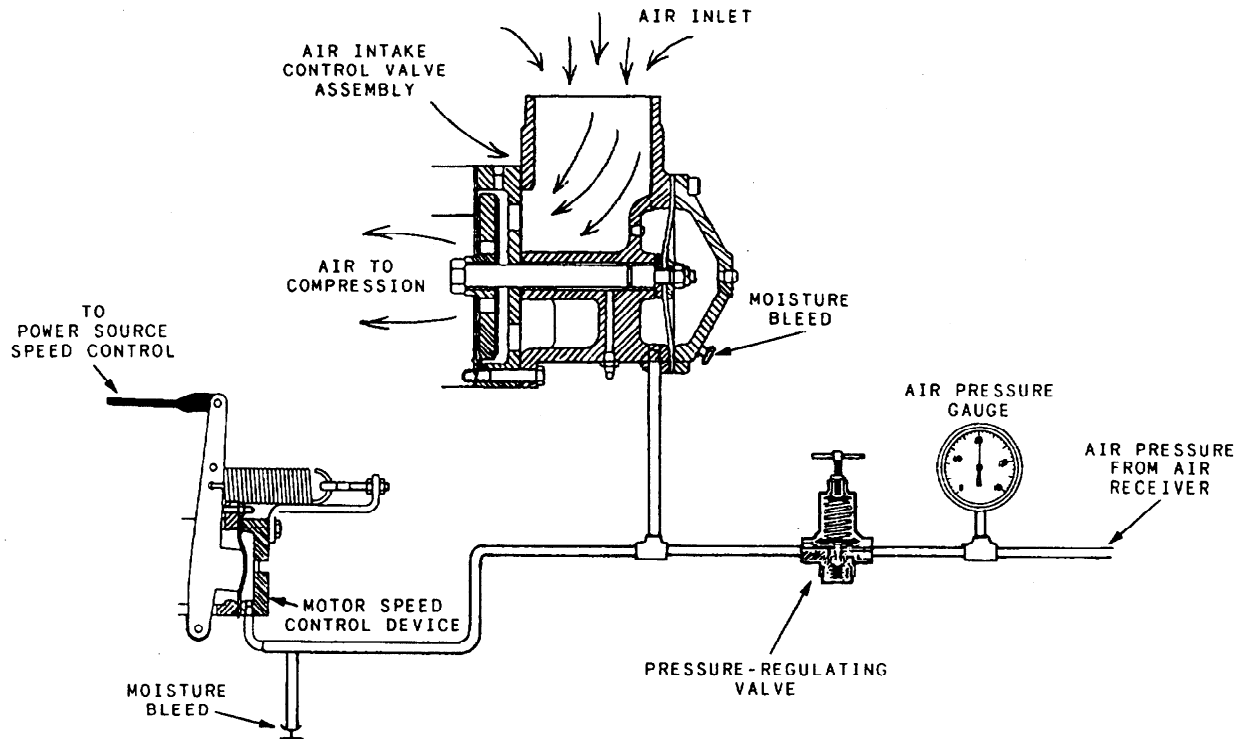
Pressure control system for a rotary vane air compressor.
